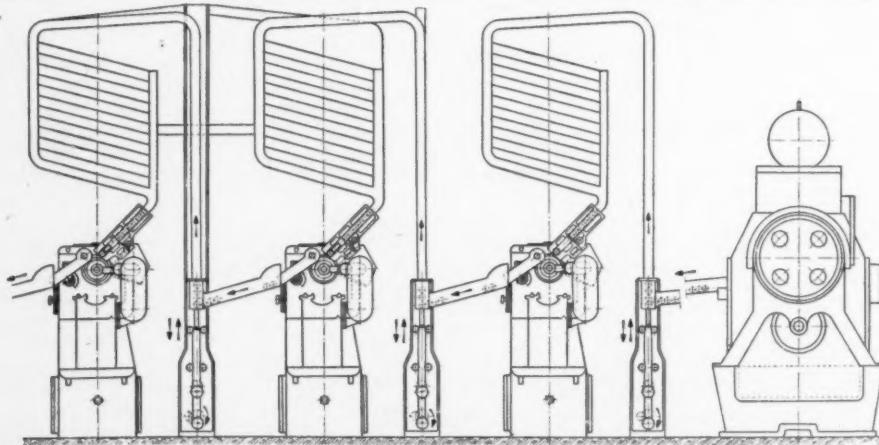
View of Part of the Automatic Installation for Producing Ball Bearing Rings
